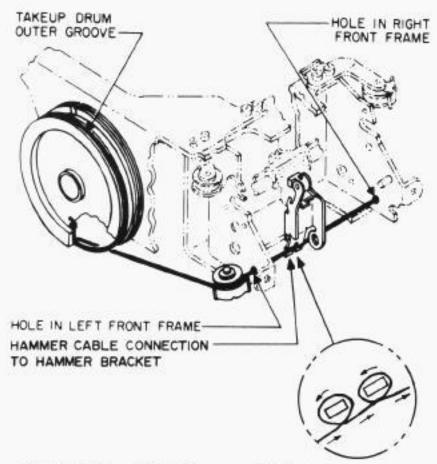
Print Hammer Cable Replacement, Cable Threading Diagram
